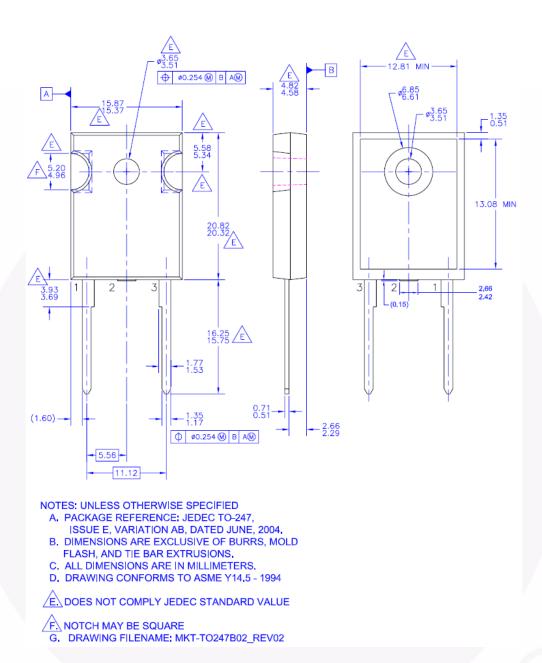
TO-247 2L - TO247, MOLDED, 2LD, JEDEC OPTION AB
